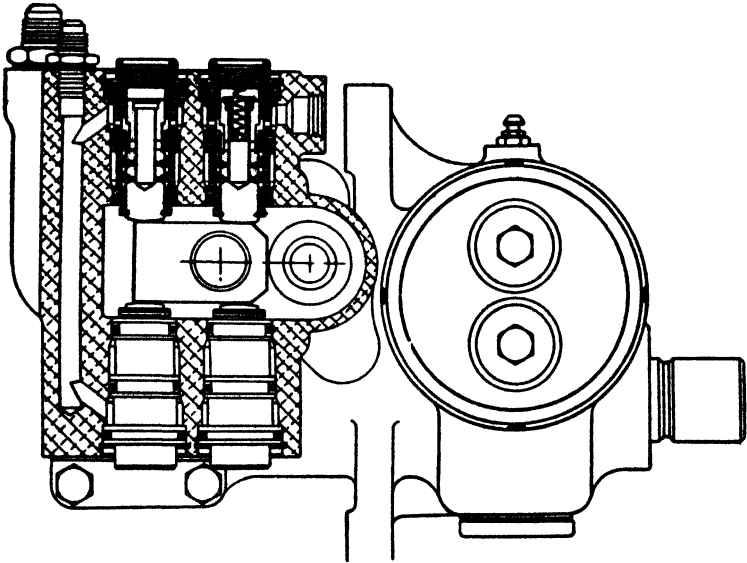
GEMMER HYDRAGUIDE, SECTION THROUGH VALVES.
